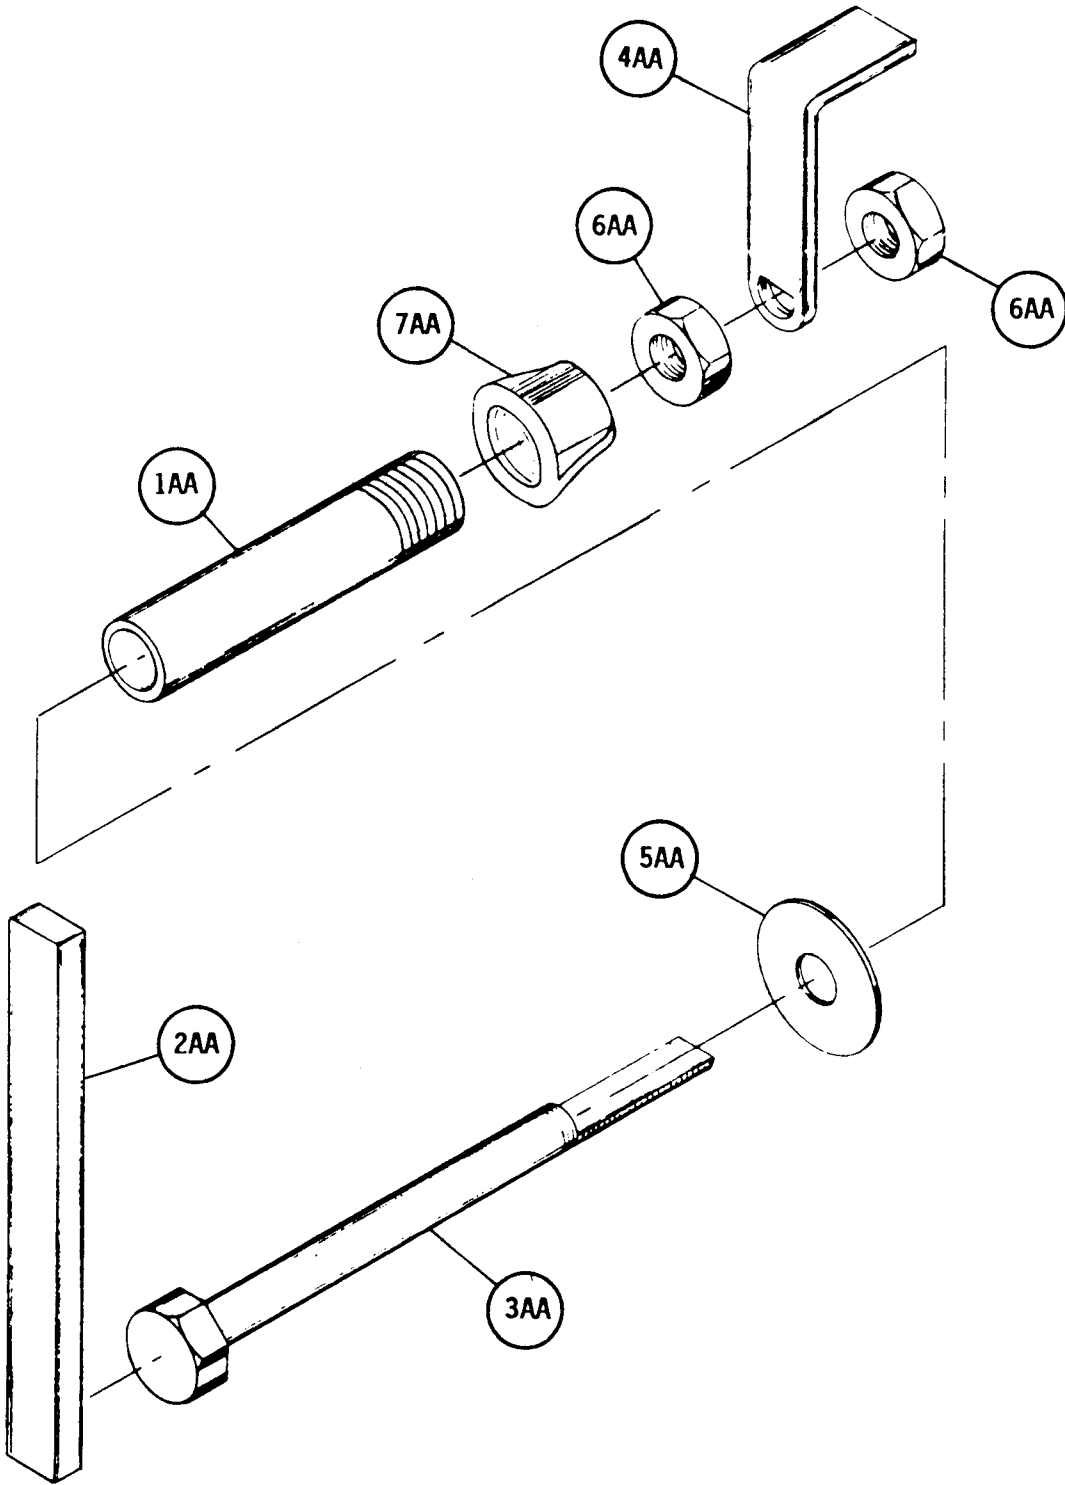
Exploded, schematic diagram of the grate shaking mechanism.
